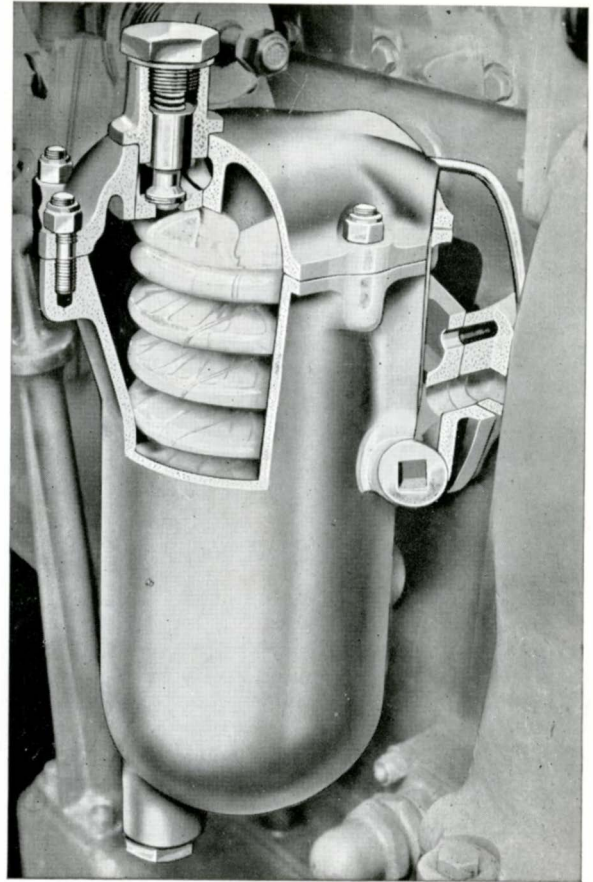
CUT-AWAY SECTION OF OIL FILTER
